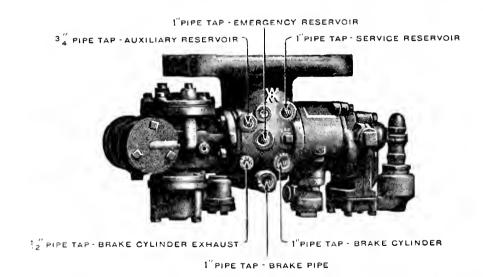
Reverse Side of Universal Valve, UC Equipment, showing Pipe Connections
